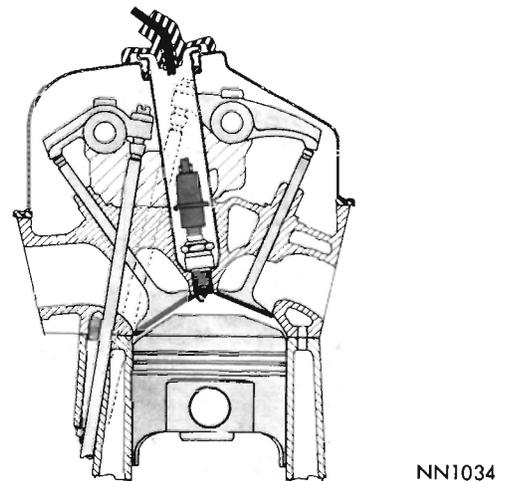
Hemi-426 Engine Combustion Chamber Cross Section
